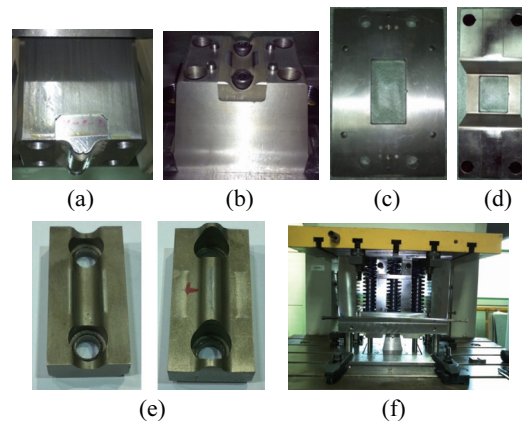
Shape of the fabricated tool set for the forming of the hat-type product: (a) upper pad; (b) punch; (c) lower pad; (d) die; (e) embossing tool; (f) assembled tool set
